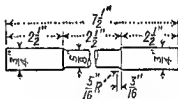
Test Specimen for Malleable Iron (A.S.T.M. A197-39).
